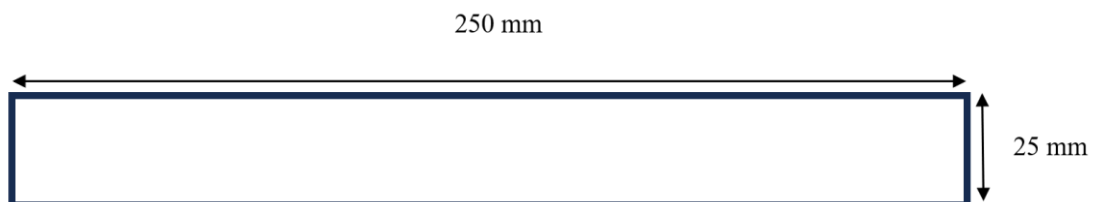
The dimensional specifications for a tensile test specimen are determined in accordance with the guidelines outlined in ASTM (D3039).
